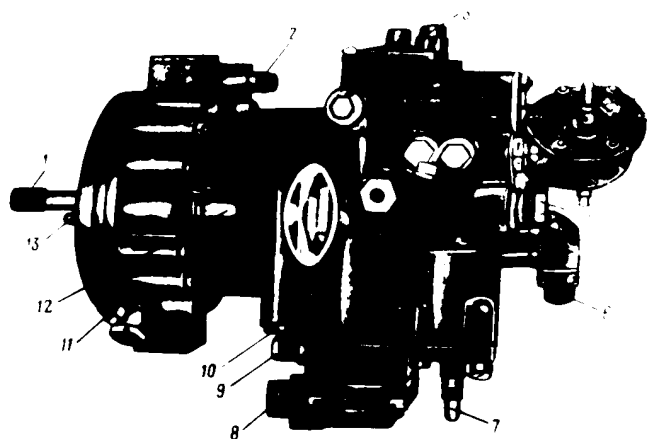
HP-11 Unit. View of Afterburner Valve Switch
